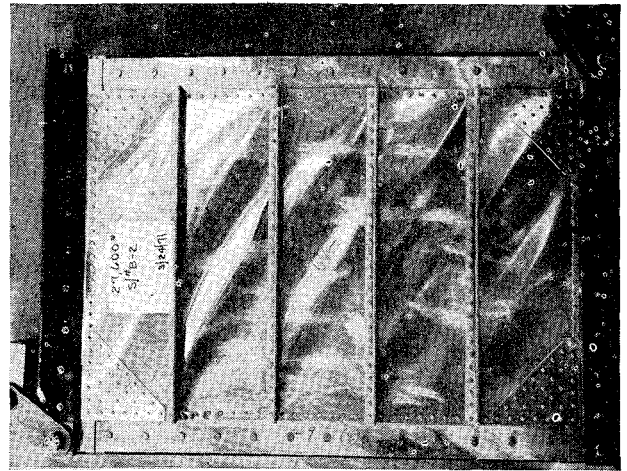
Shear failure of boron/epoxy reinforced stringer test panel.
